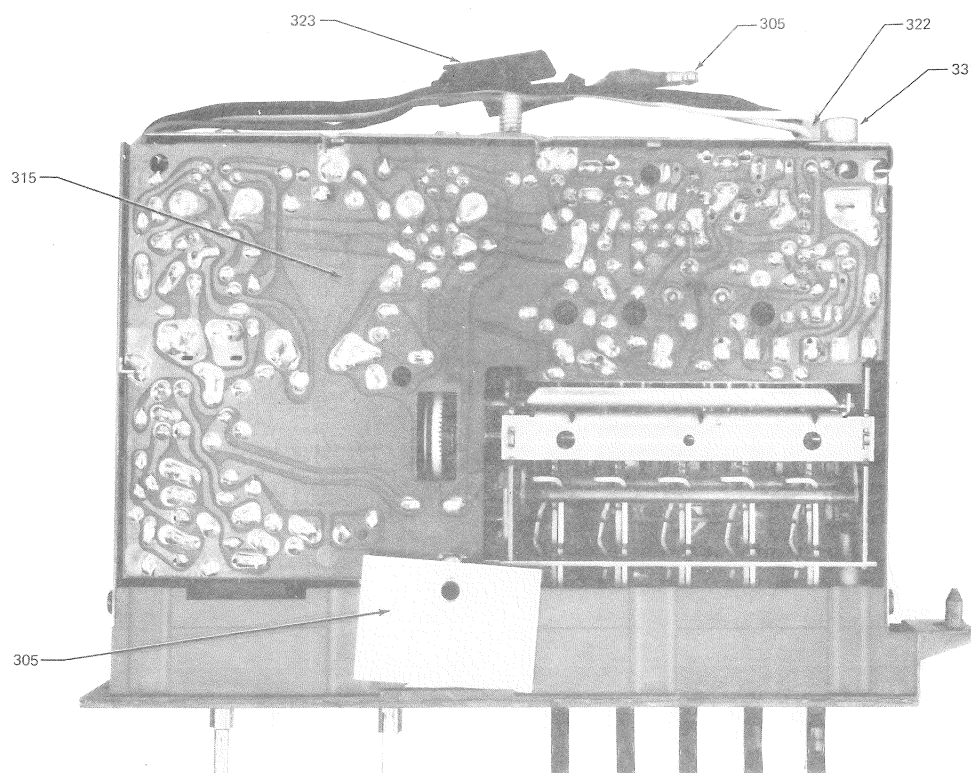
PARTS LOCATION, TOP VIEW (3501457 and 3501458)
